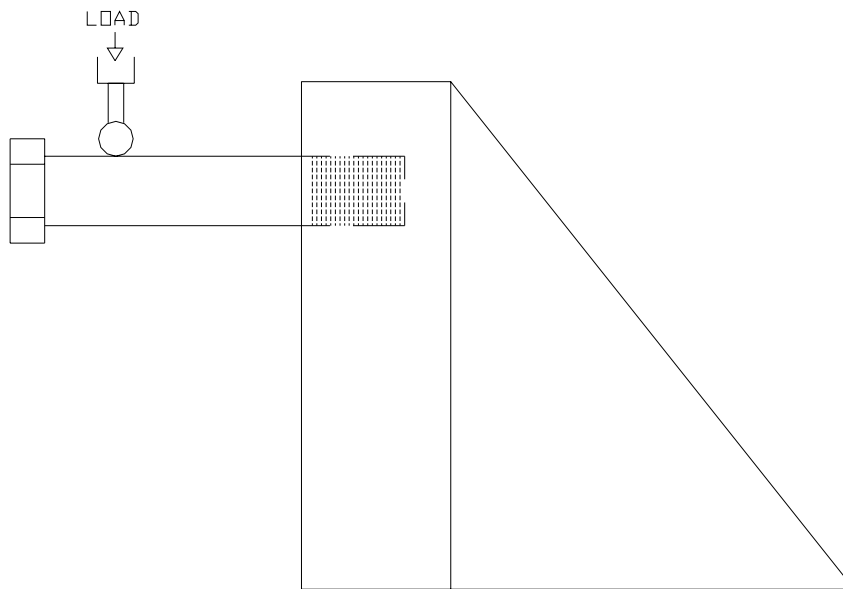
Bolt Bending Schematic for Cantilever Method.
